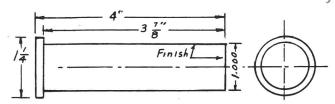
STANDARD JOMINY TEST SPECIMEN
